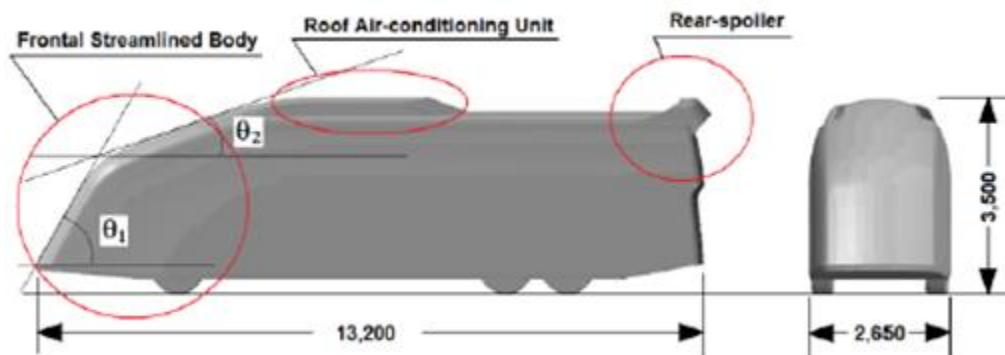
dimensional view of streamline design designed coach with general shape of rear spoiler.[53]
